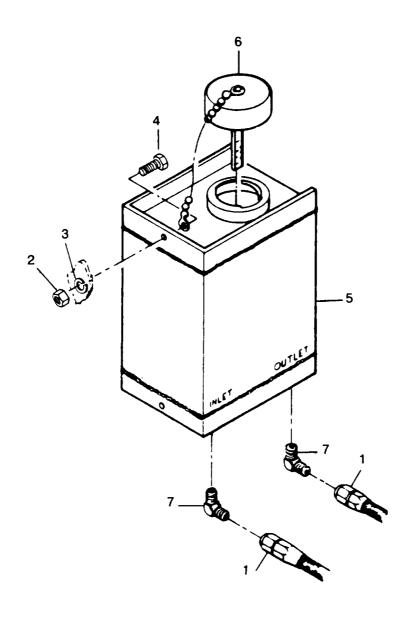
Hydraulic Sump, Removal and Installation (Electro-Hydraulic Governor Equipped Precise Sets Only)
